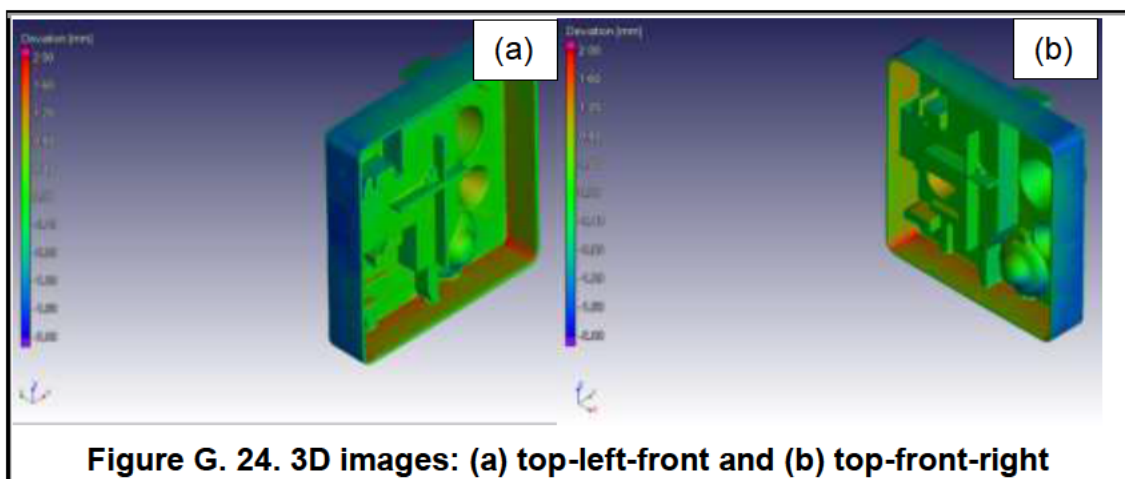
3D images: (a) top-left-front and (b) top-front-right
